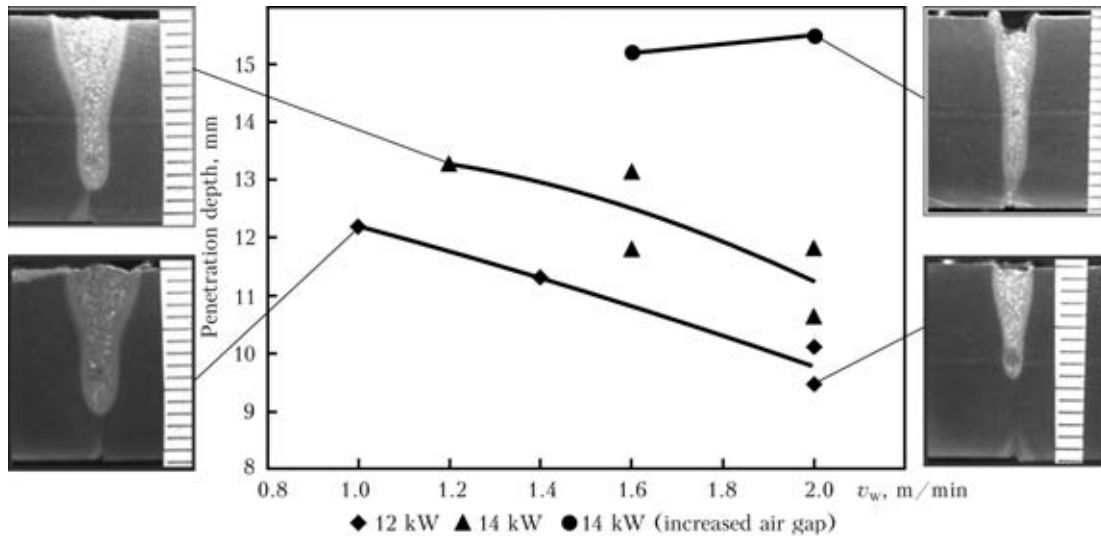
Depth of penetration of St3 steel 16 mm thick at different parameters of laser welding
